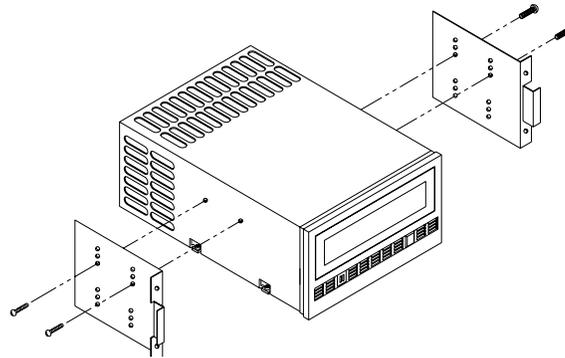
Installing Mounting Brackets to a 5.0 Gbyte 8mm Tape Drive
